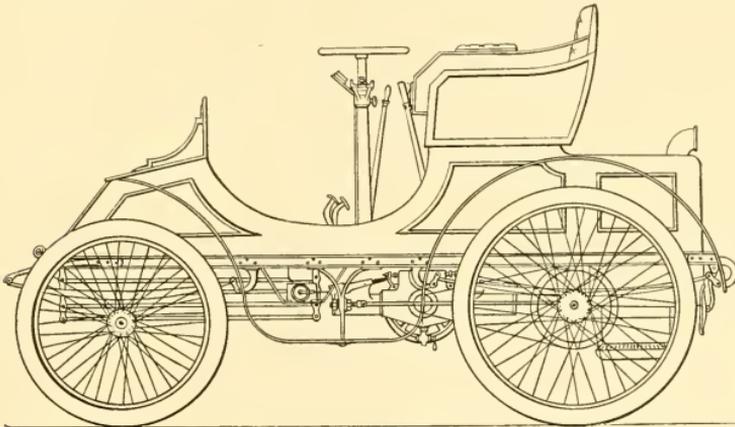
SIDE VIEW OF SERPOLLET CARRIAGE, SHOWING LOCATION OF ENGINE, BOILER, CONDENSER, ETC.
